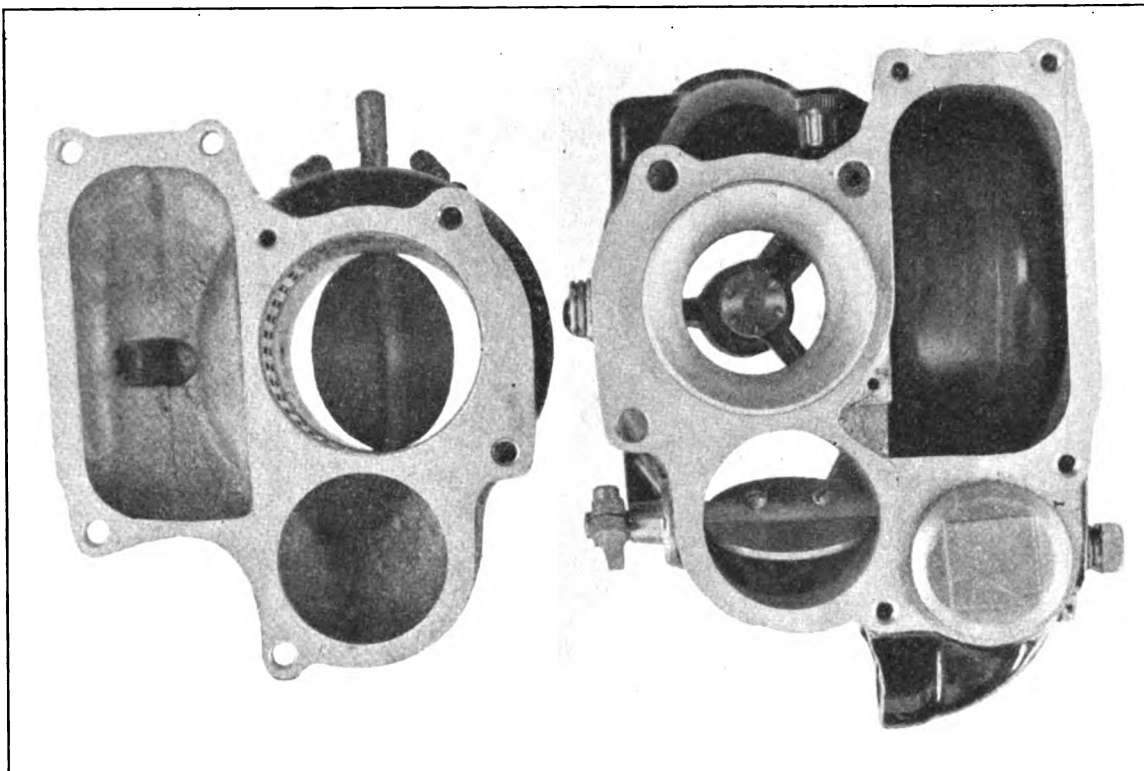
Stromberg NA-S6 carburetor. Sectional view.
